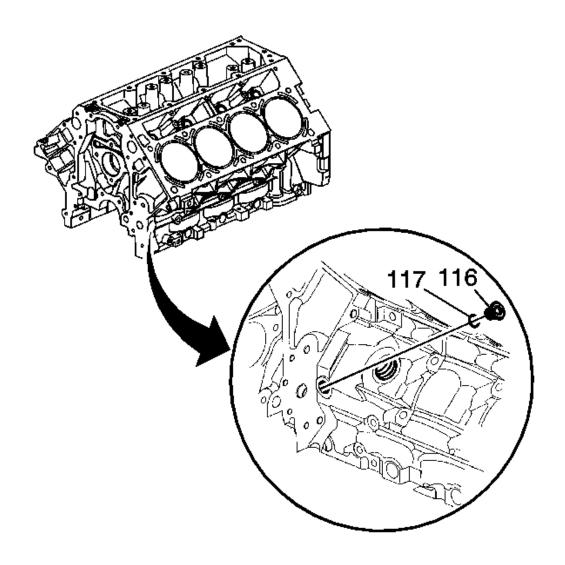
Locating Engine Block Left Front Oil Gallery Plug & Seal Courtesy of GENERAL MOTORS CORP.
